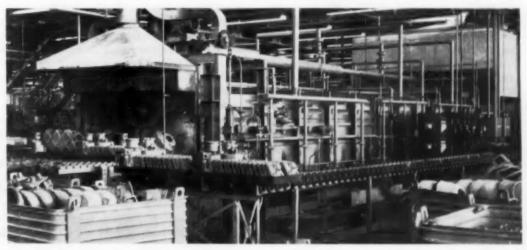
Schematic Arrangement of Mechanized Equipment for Carburizing Small Crankshafts
